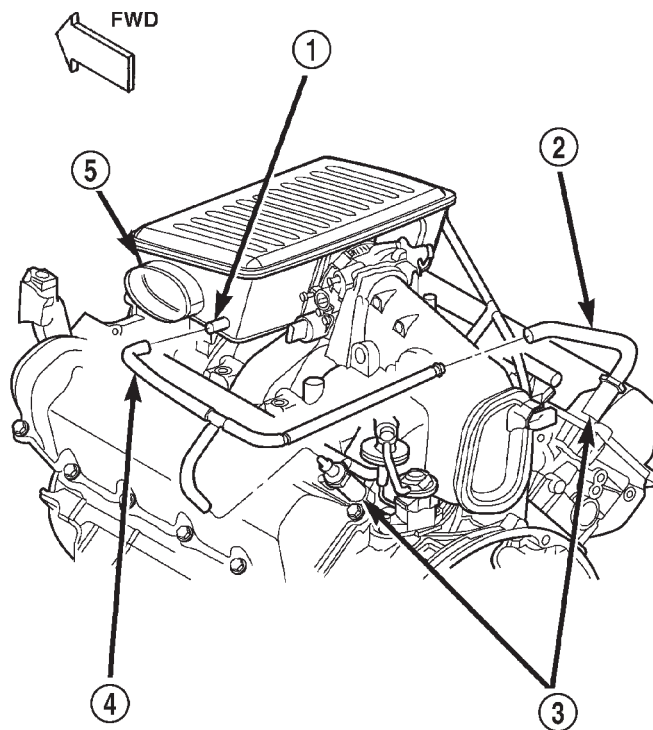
PCV Valve/Oil Filler Tube (Housing)—4.7L Engine
